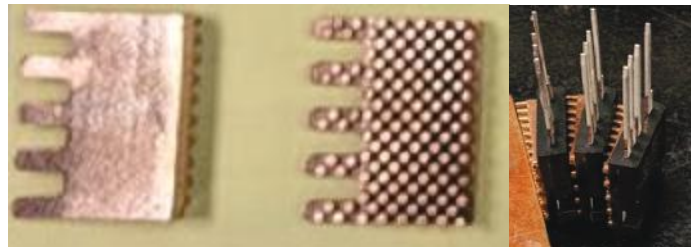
Copper heat sink for TO-247 silver sintering attachment
